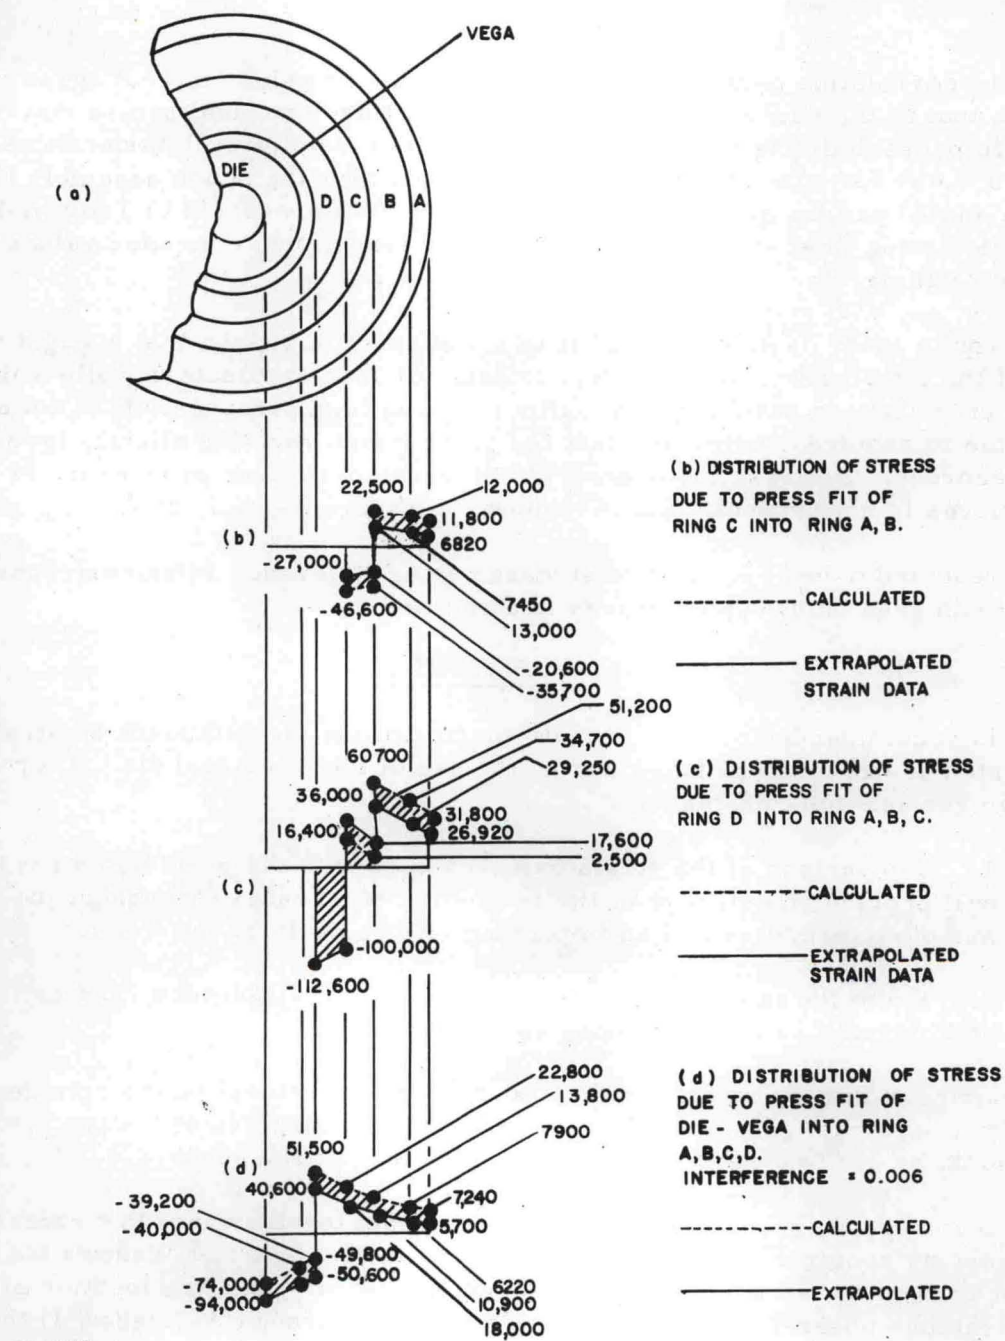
FINAL STRESS ANALYSIS OF DIE ASSEMBLY
